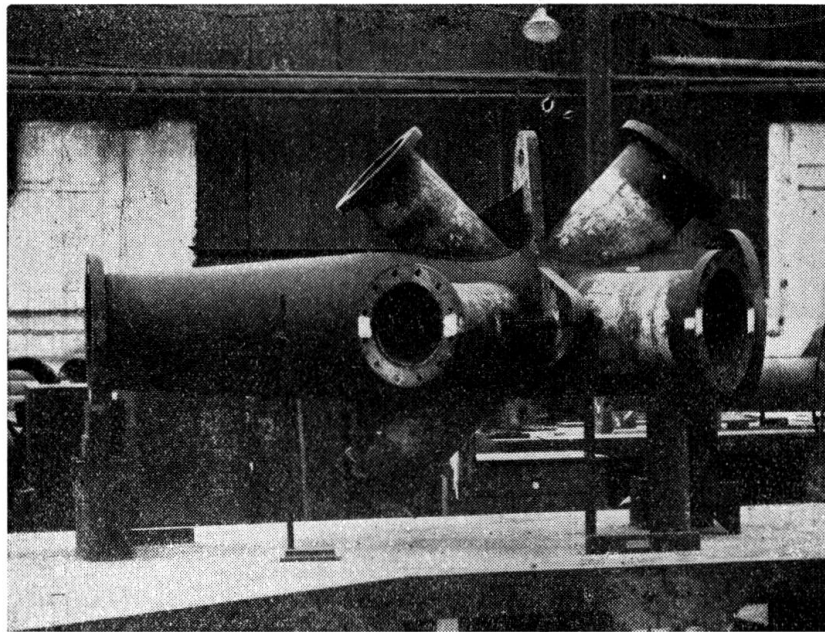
Checking of heel plates after welding on junction piece
